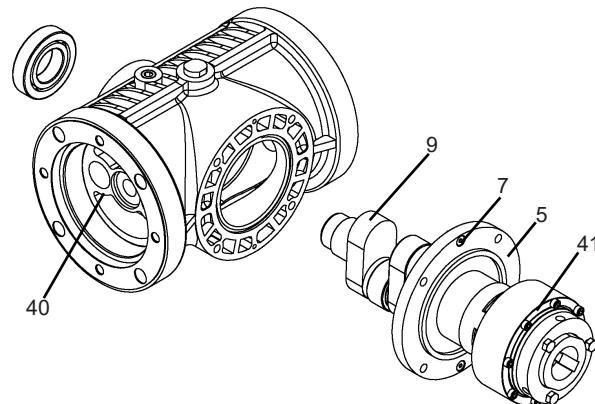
Remove crankshaft assembly 拆卸曲轴组件
